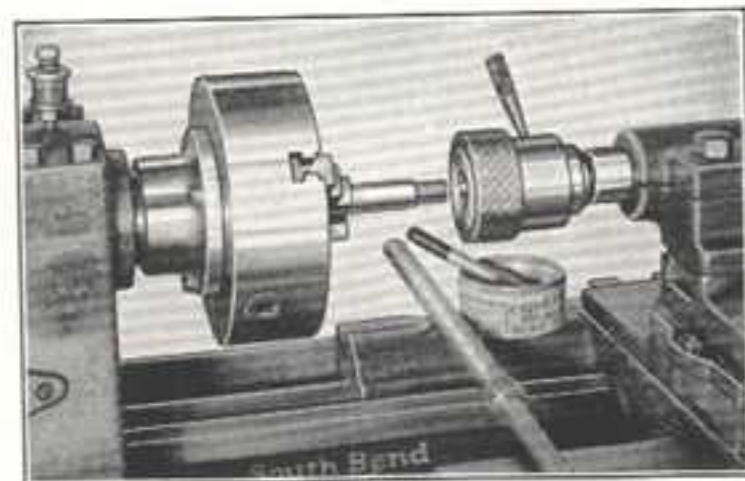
Die Mounted on Lathe Carriage for Cutting Accurate Screw Threads
